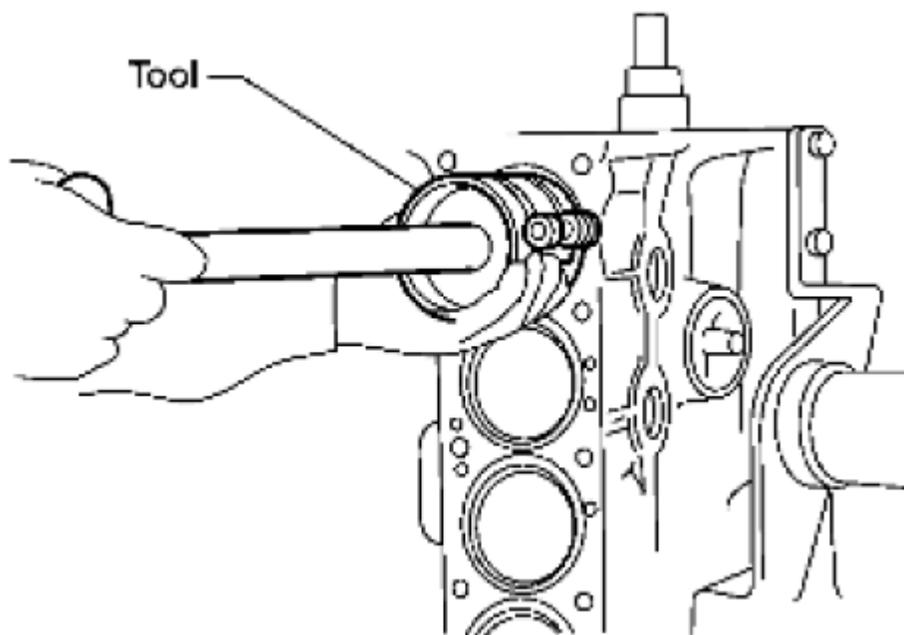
Installing Piston And Connecting Rod Assembly To Crankshaft
